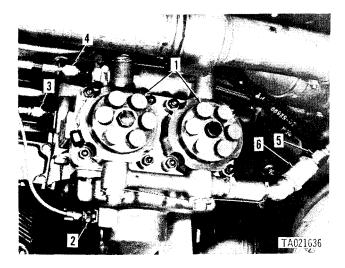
, Removing or installing fuel injector tubes from fuel injection pump.
